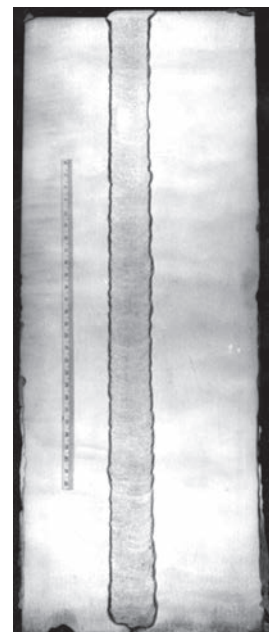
Macrosection of a butt joint with a weld depth of 500 mm
